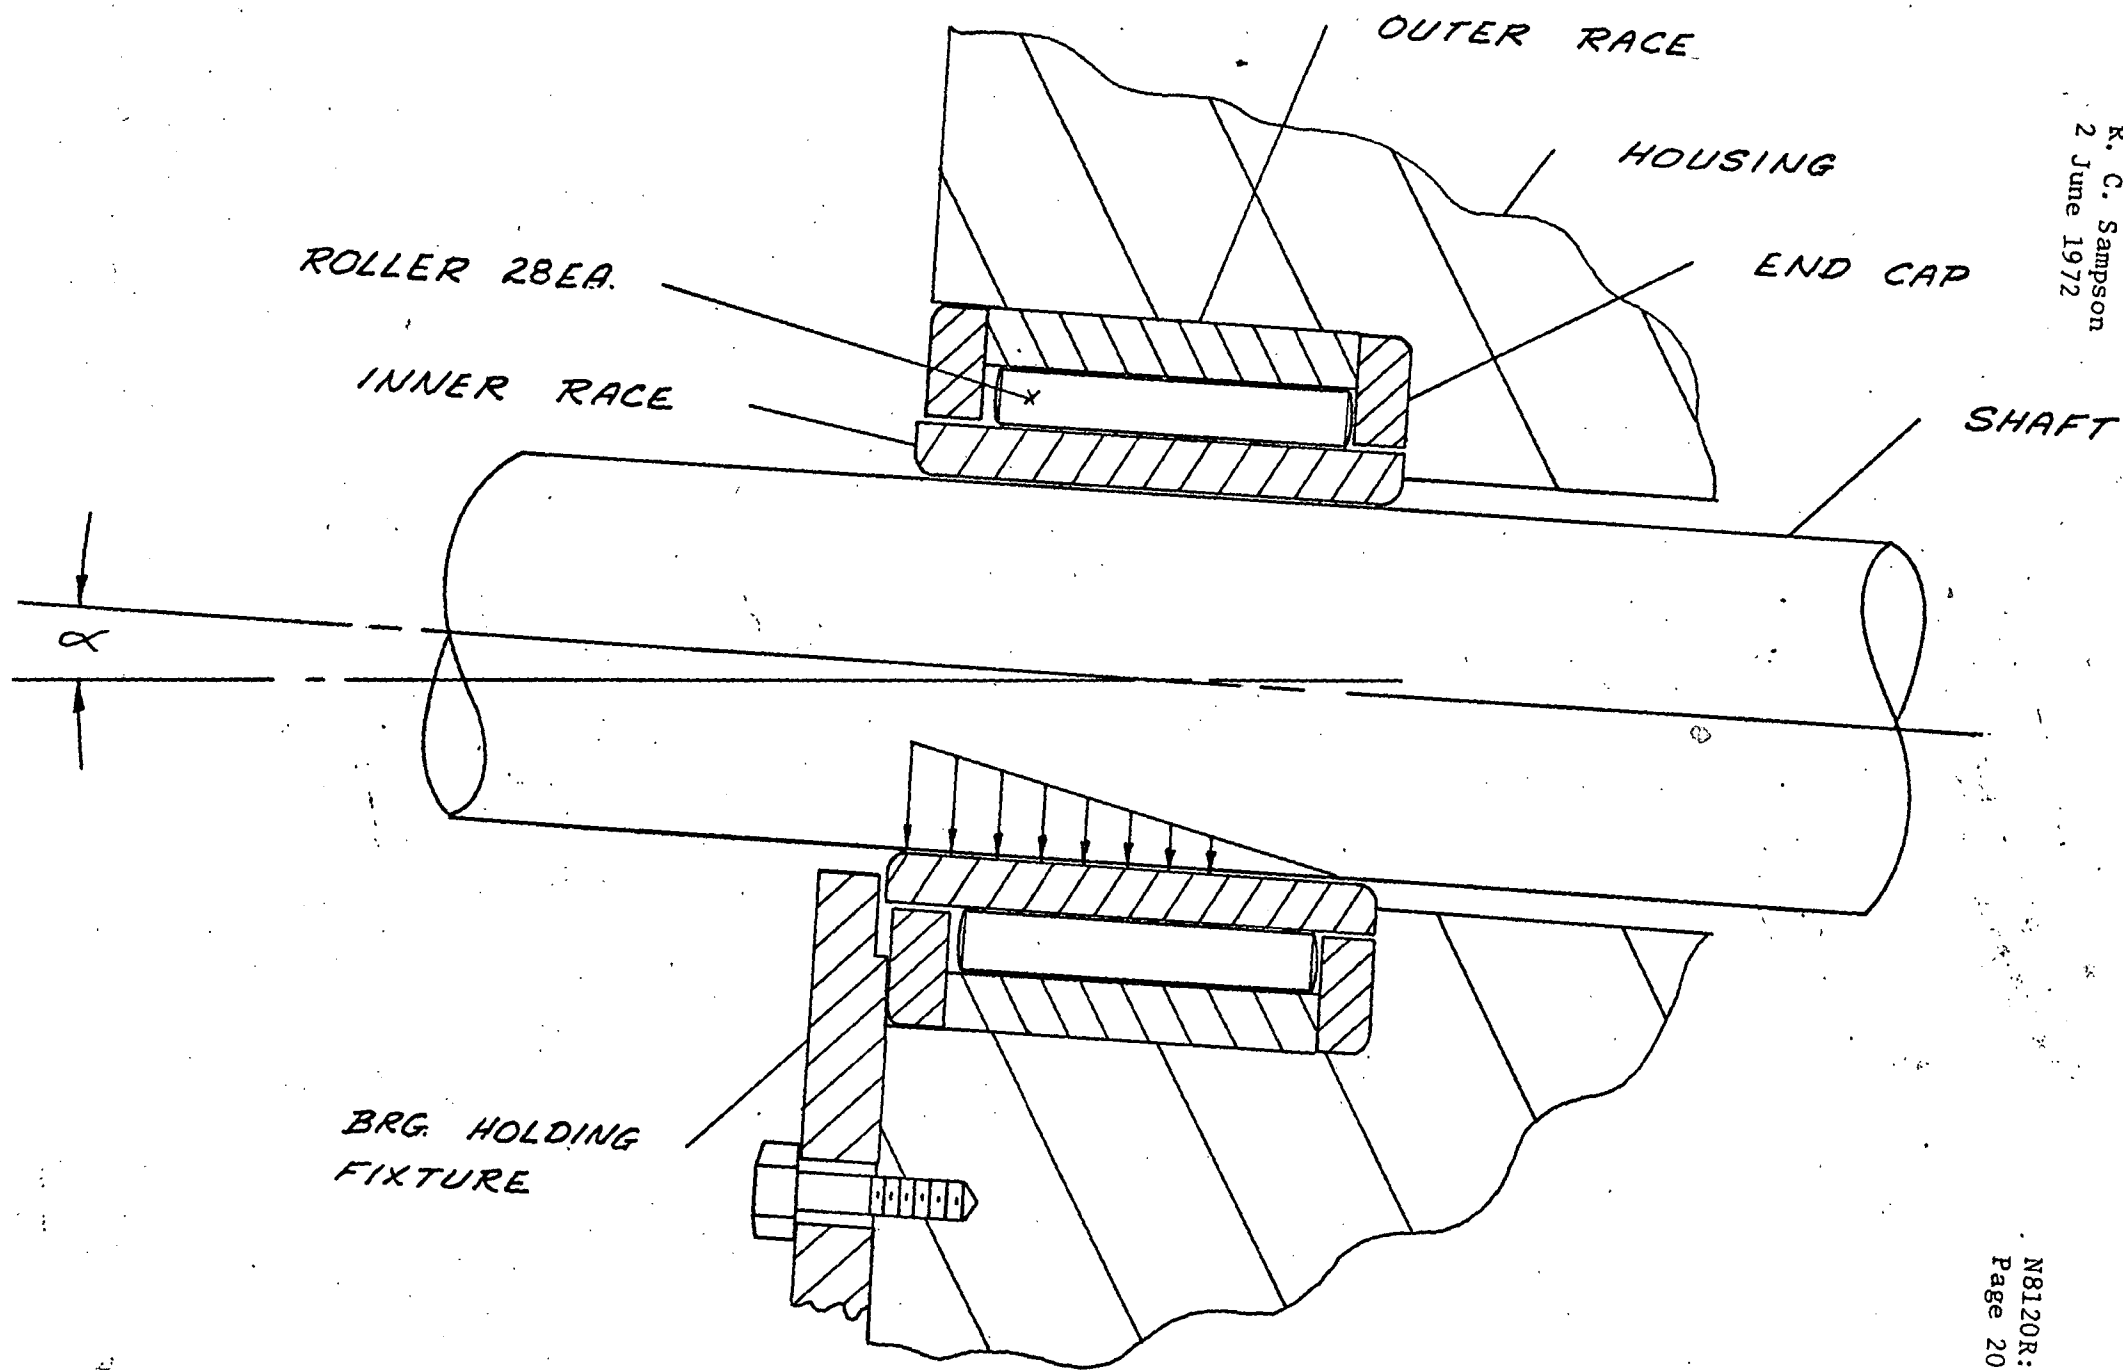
ROLLER BEARING AND SHAFT MISALIGNMENT
